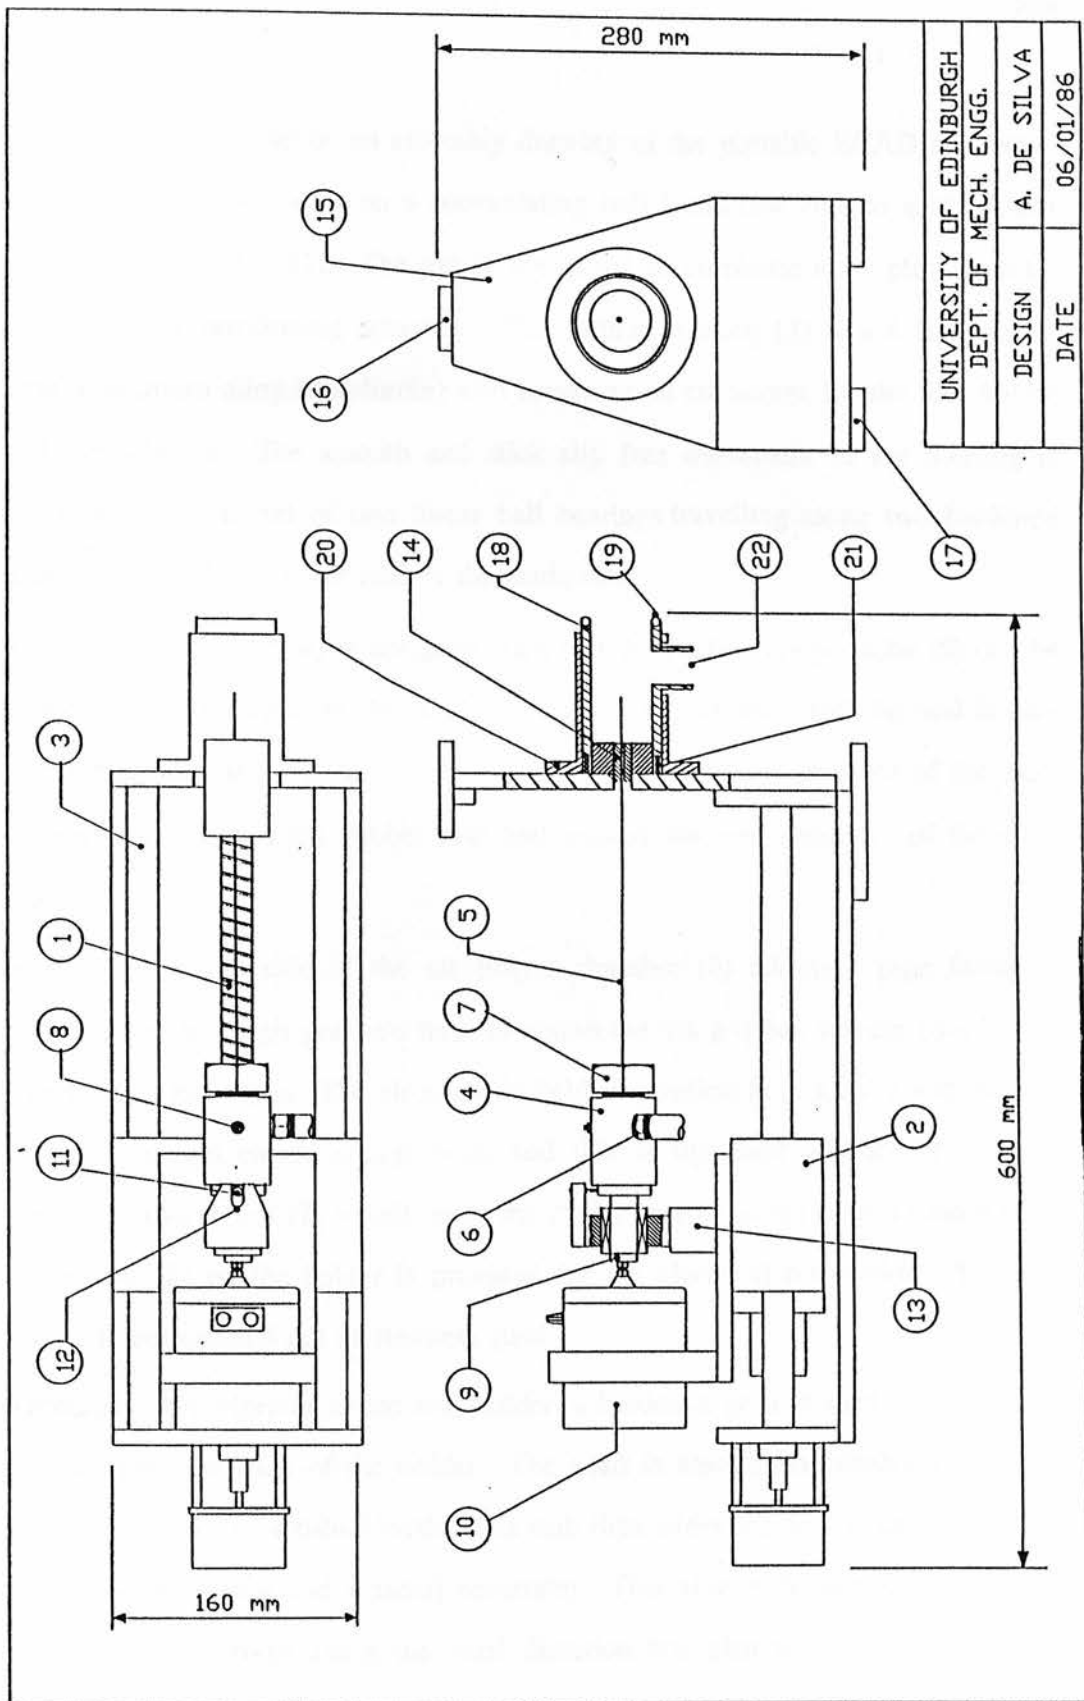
Sectional assembly drawing of the portable ECAM drill
